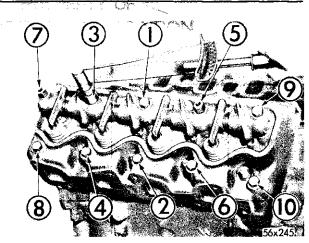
Tightening Cylinder Head Bolts (SpitFire)
